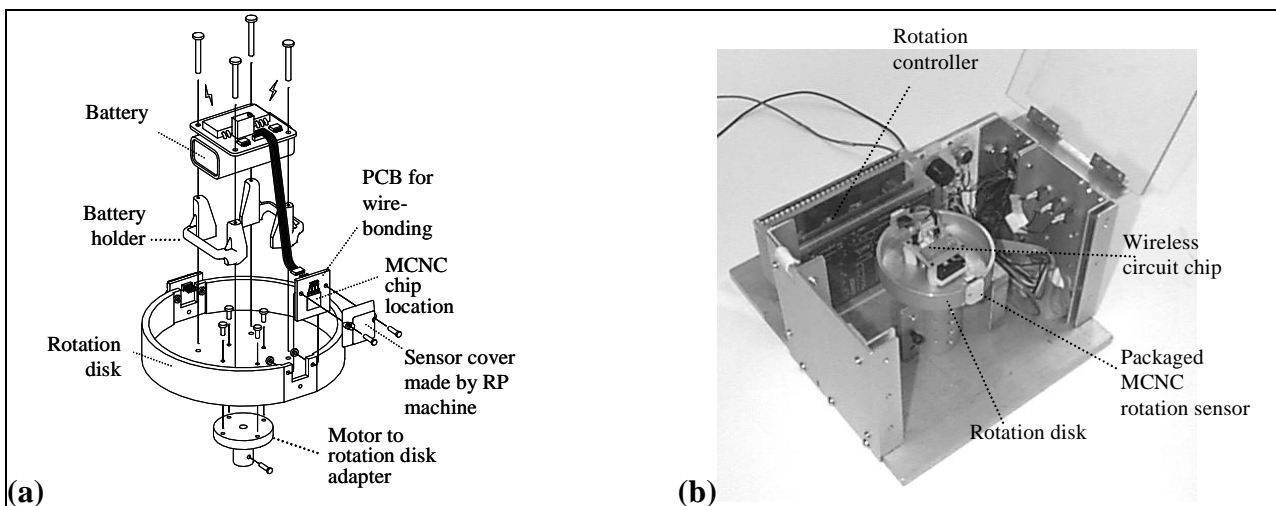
(a) Conceptual drawing and (b) actual picture of the experimental rotating disk packaged with wireless rotation MEMS sensor.
